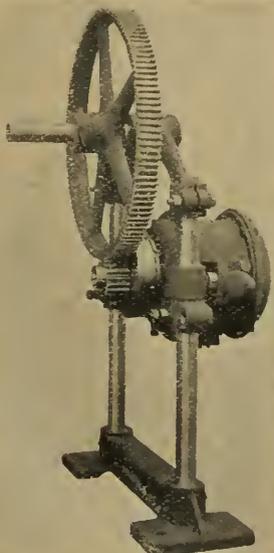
NEW OERLIKON GEARED INDIVIDUAL DRIVE, WITH MOTOR PROJECTING ON OUTER SIDE OF GEAR SUPPORT.
